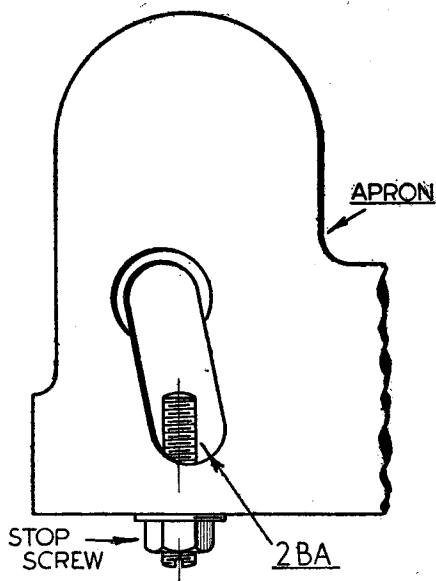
Method of fitting an adjustable stop-screw to the apron
